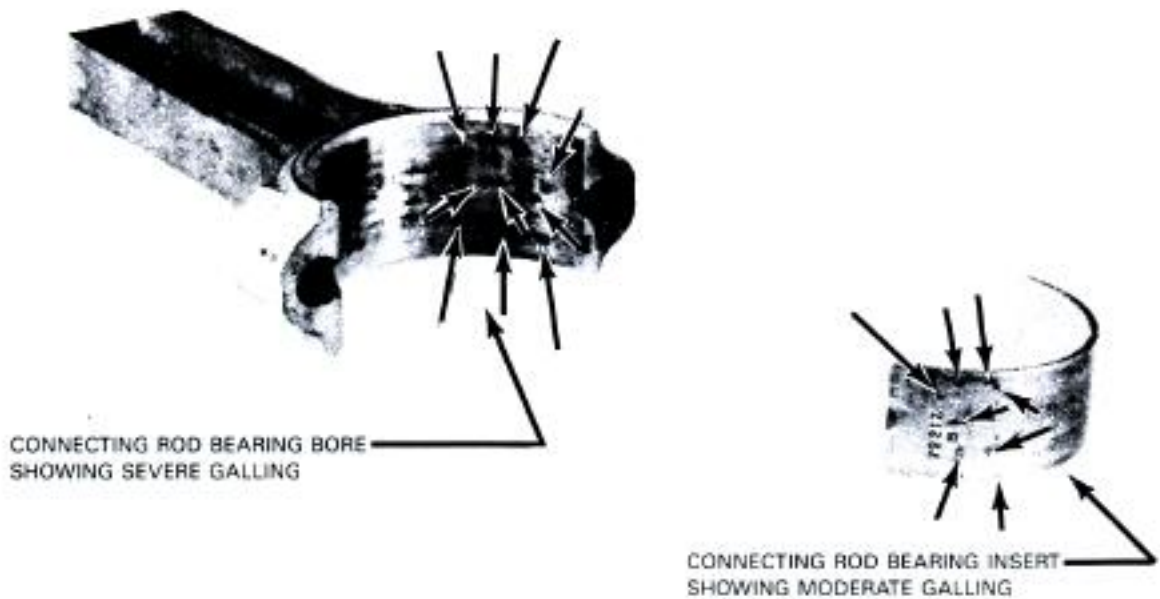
Bearing Insert and Connecting Rod Showing Damage by Galling
